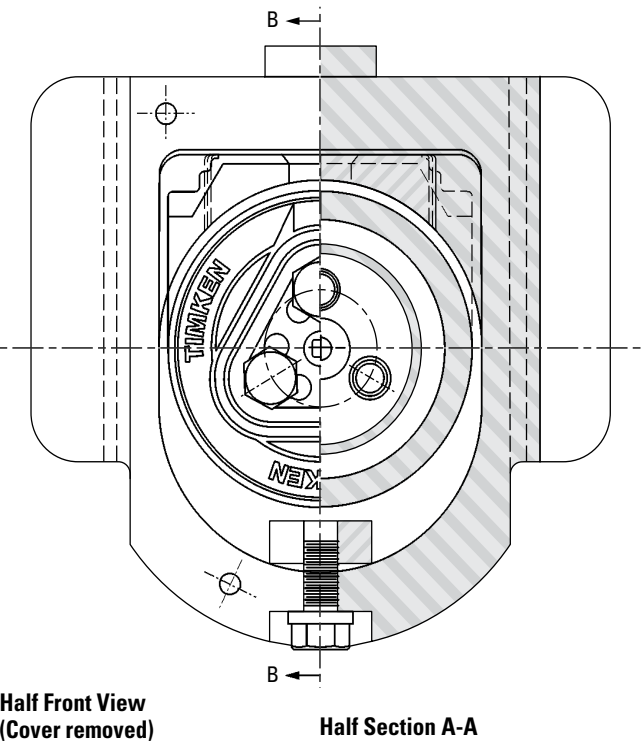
Bottom pour ingot car equipped with Timken AP bearings
